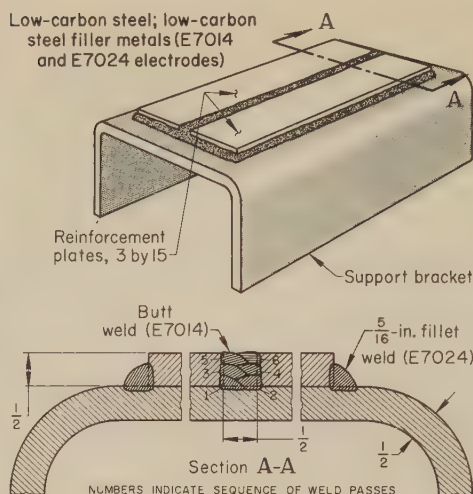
Support bracket to which reinforcement plates were joined by horizontal fillet welds and then a six-pass square-groove weld (Example 4)
